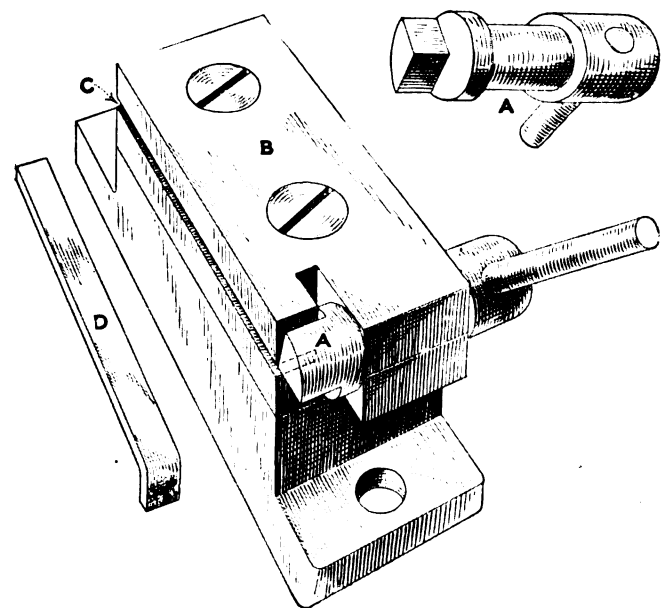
ANOTHER VIEW OF BRAKE FOR BENDING VARIOUS WIRE ANGLES
